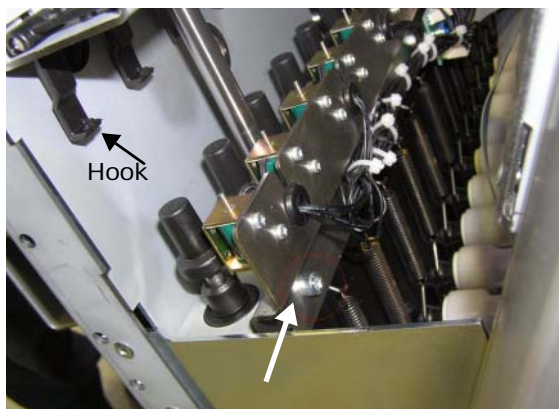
The solenoid rail is fastened on both ends with a screw to the dispensing module.
